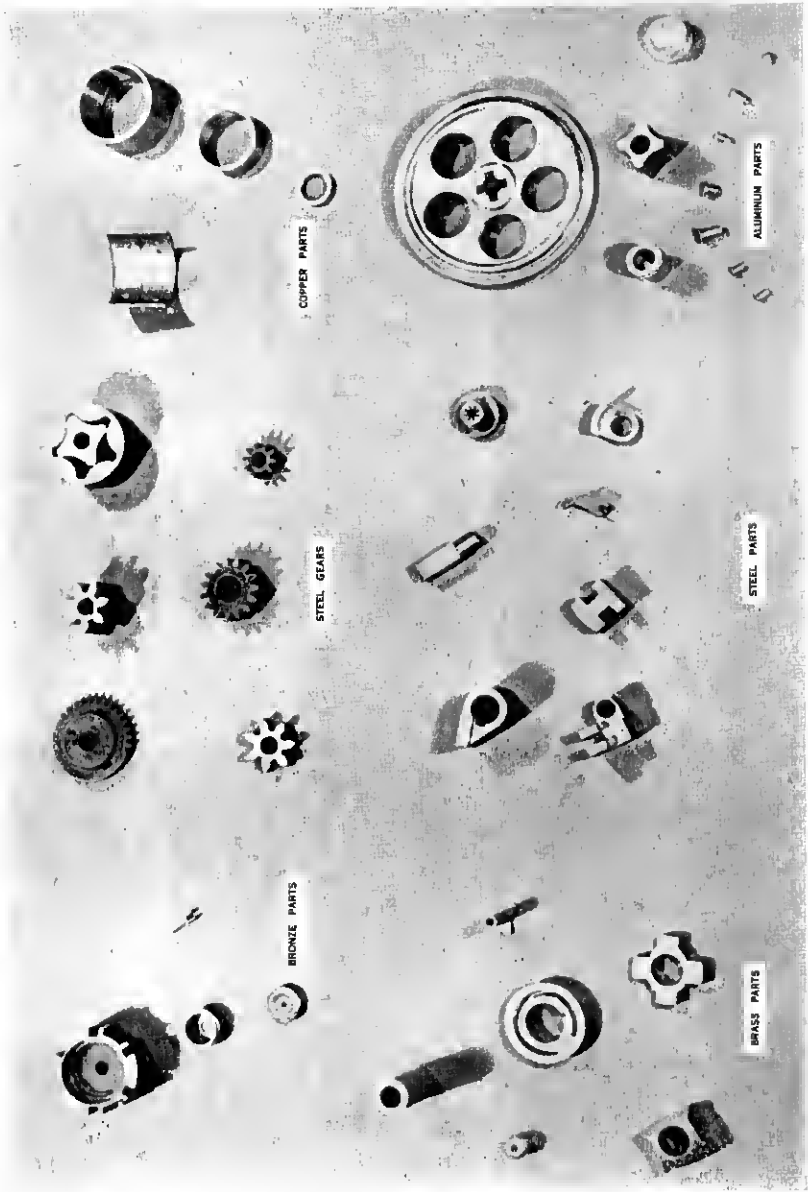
Some machine parts made by powder metallurgy.<sup>23</sup>
